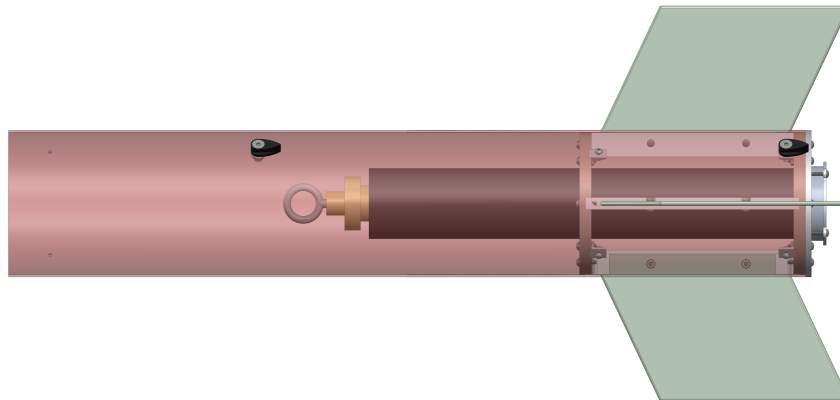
CAD model of the Drogue Parachute Bay/Fin Can with attached rail guides, RMFS, and motor casing.
